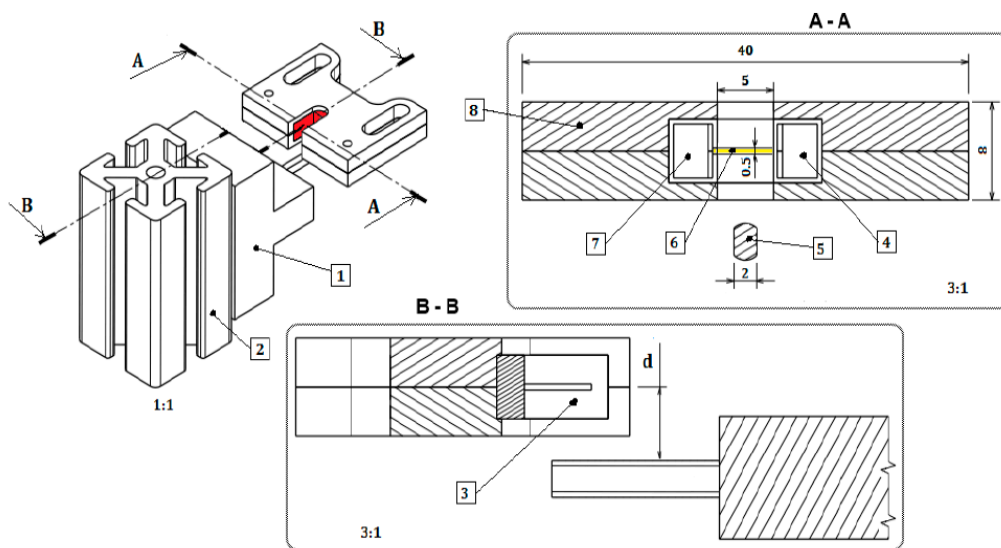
Illustration of the sensor mounting system ((1) end-pin support; (2) aluminium beam; (3) sensor; (4) transistor; (5) adjustable end-pin, distance d ; (6) 0.5 mm beam; (7) light-emitting diode (LED); and (8) housing) [mm].
